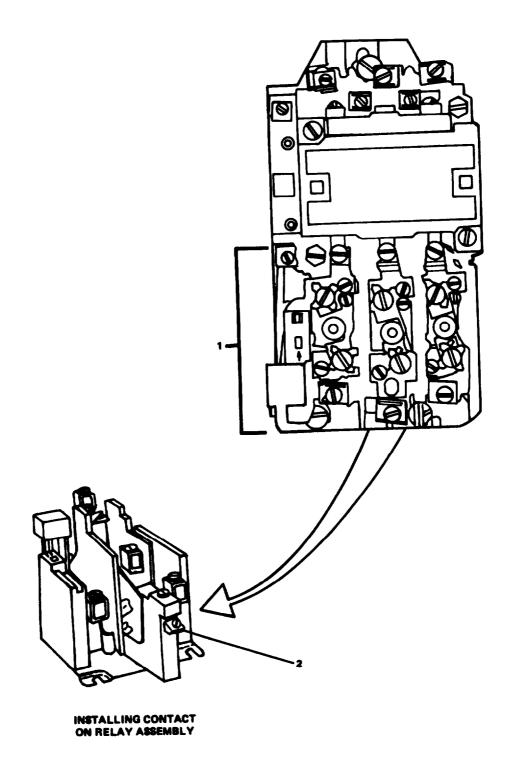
Motor Controller, Steering Gear Hydropump,
